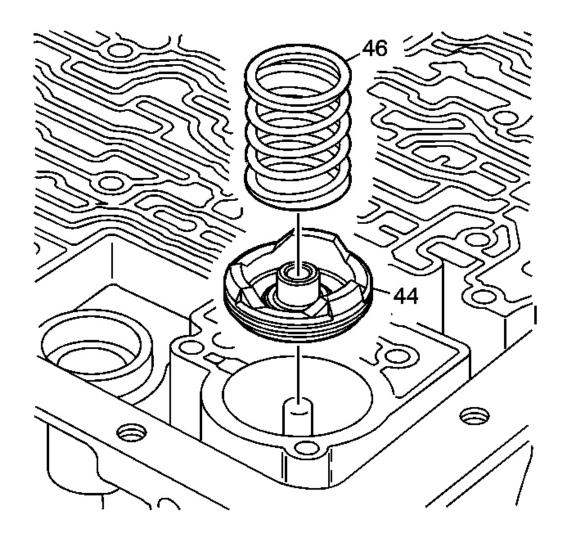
Identifying 3-4 Accumulator Piston & Accumulator Spring Courtesy of GENERAL MOTORS CORP.
